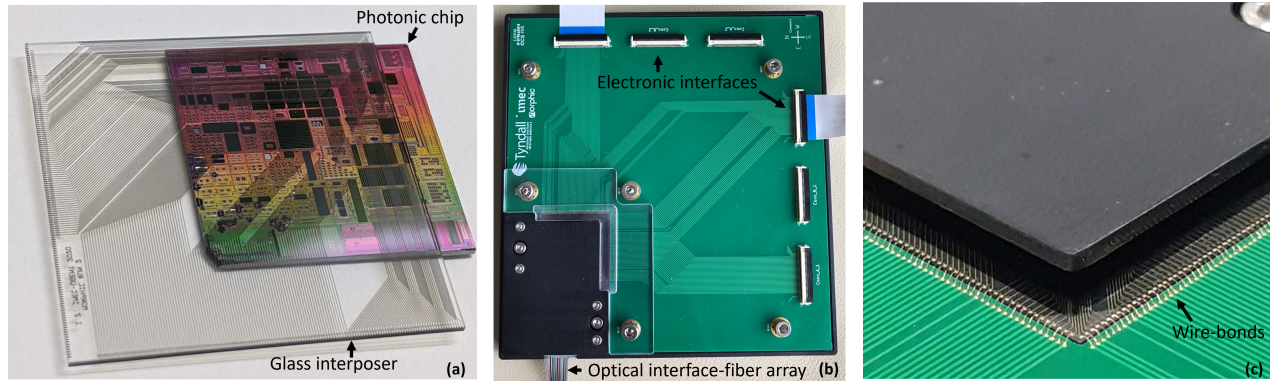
(a) Sealed photonic integrated chip flip-chipped onto a glass interposer. The interposer is used to fan-out the electrical connections from the photonic chip to the edge of the interposer. (b) Picture of the packaged mini-demonstrator. Optical and electrical interfaces are annotated. (c) The wire-bonds from the pads at the edge of the glass interposer to the pads on the printed circuits board.
